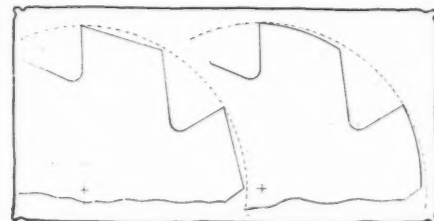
Left—Ordinary reamer tooth contour. Right—Pratt & Whitney eccentric relief tooth
